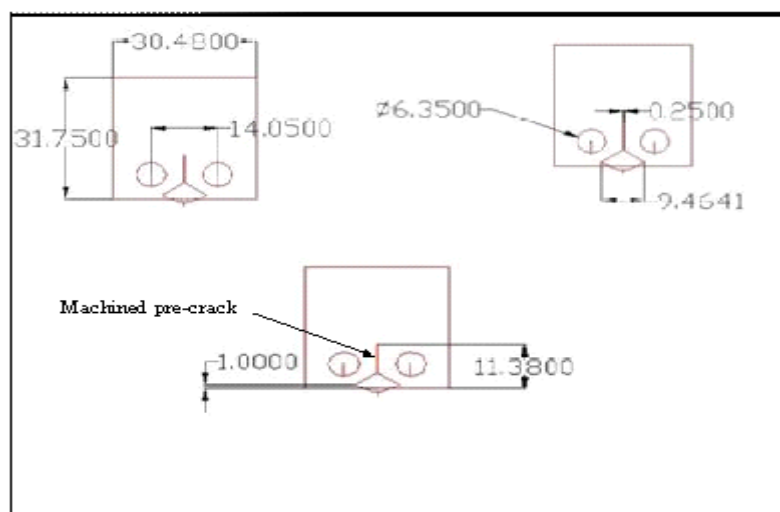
Specifications of compact tension C(T) sample showing the dimensional details.
